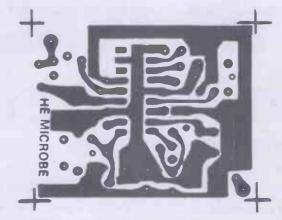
PCB layout for the Microbe receiver. As with the transmitter, this layout MUST be strictly followed.
